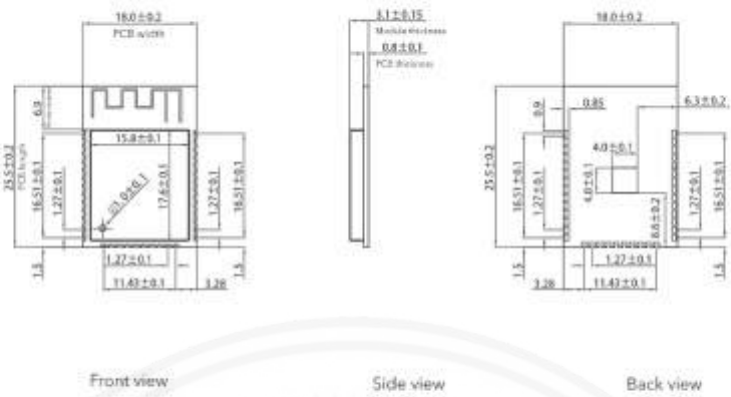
Dimensions of ESP32-WROOM-32 (ESP-WROOM-32)
